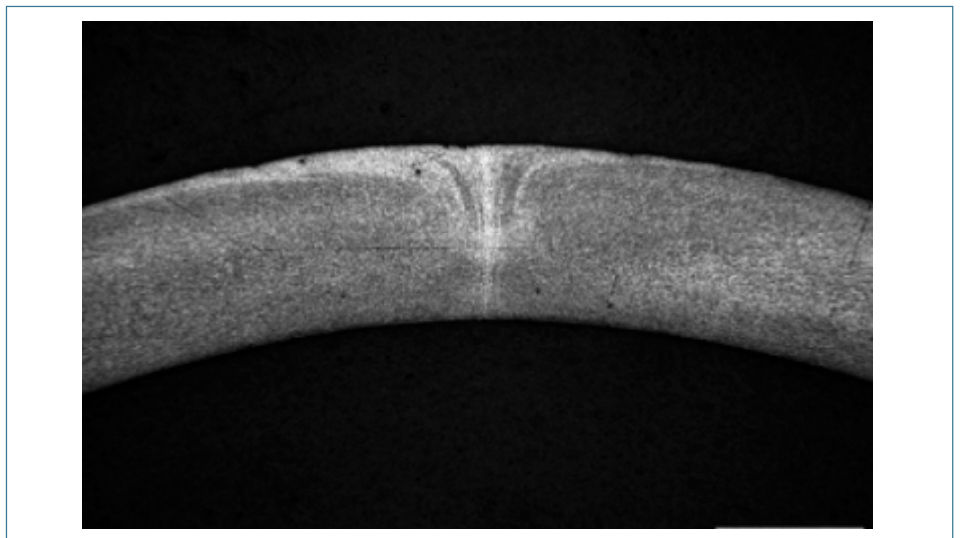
Weld seam found on a cross-sectioned tube sample.
